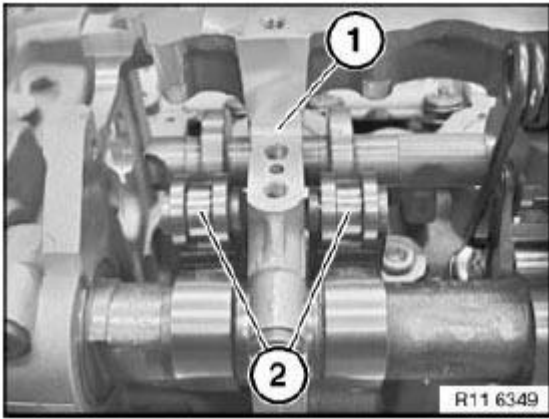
Identifying Contact Surfaces And Intermediate Levers
